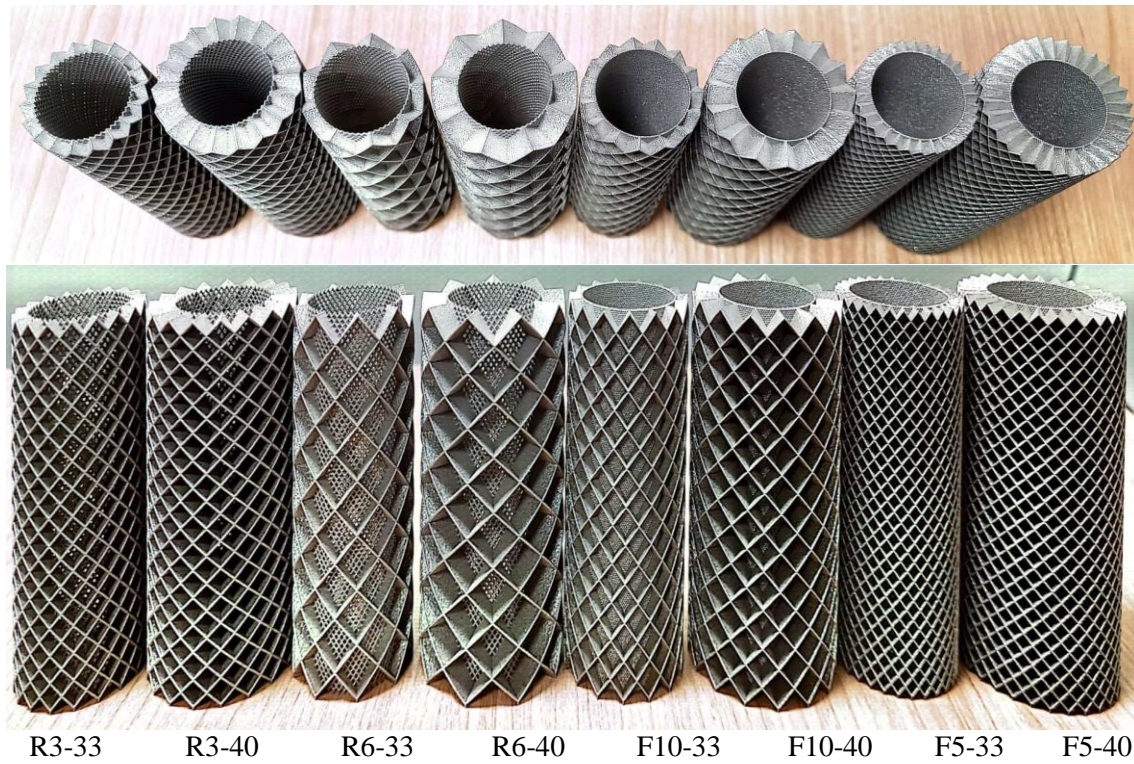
The eight 3D printed cylindrical lattice specimens.
